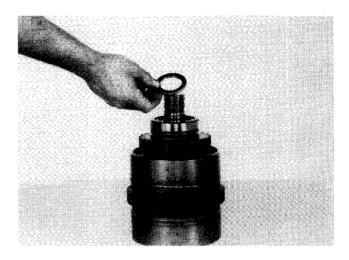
Install bearing end plate, aligning notch in plate with lock ball.
